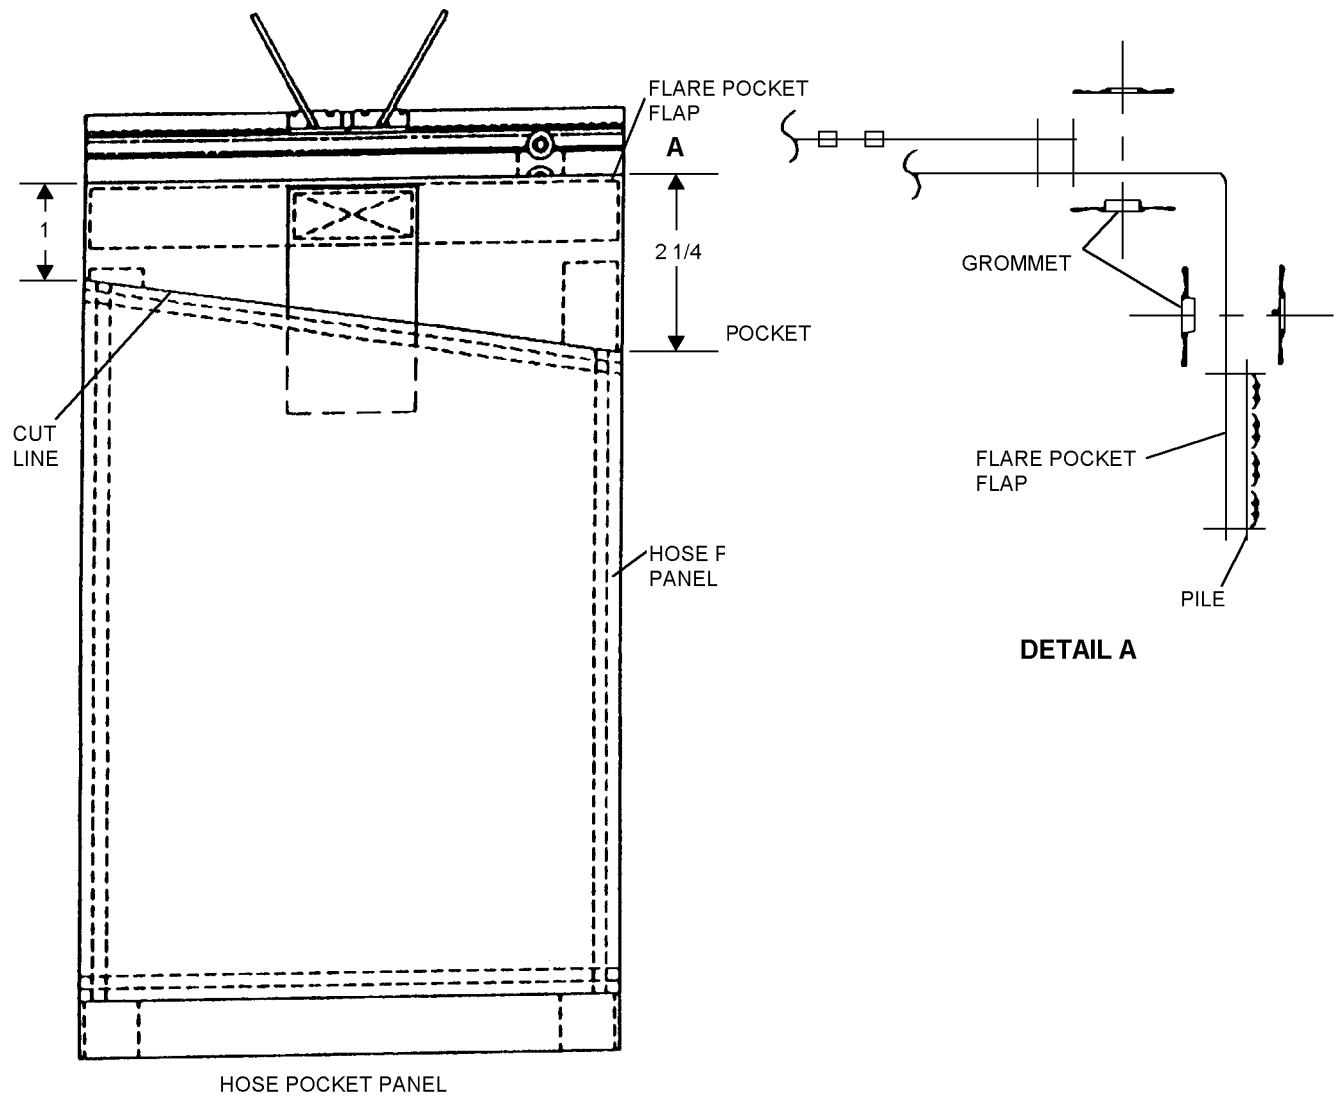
SRU-40/P HABD Hose Pocket Assembly
